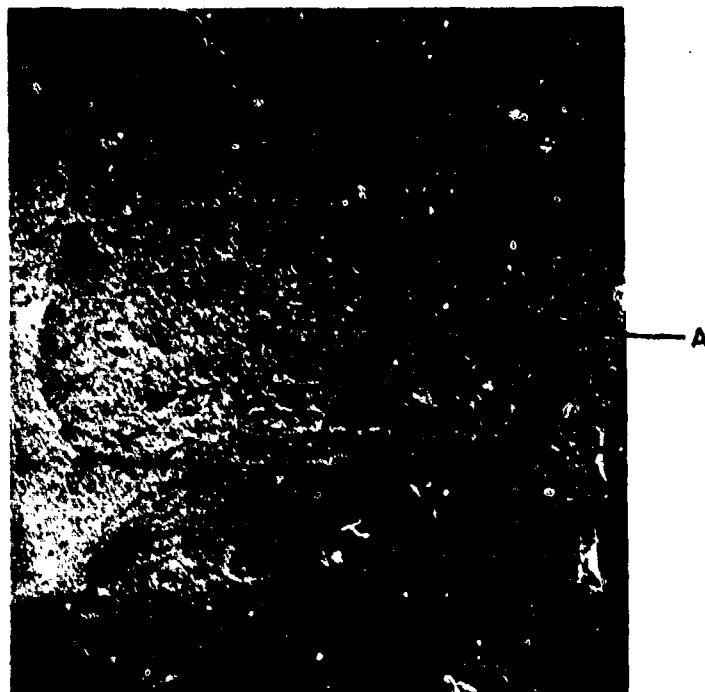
Fracture surface of an A-514 weld Charpy specimen tested at -18°C , 8x.
